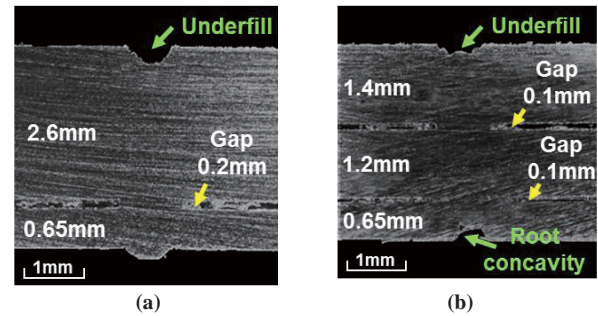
Cross sections of lap welds of 2 sheets (a) and 3 sheets (b) of Zn-coated steels with gaps at 3 kW laser power and 50 mm/s welding speed.
